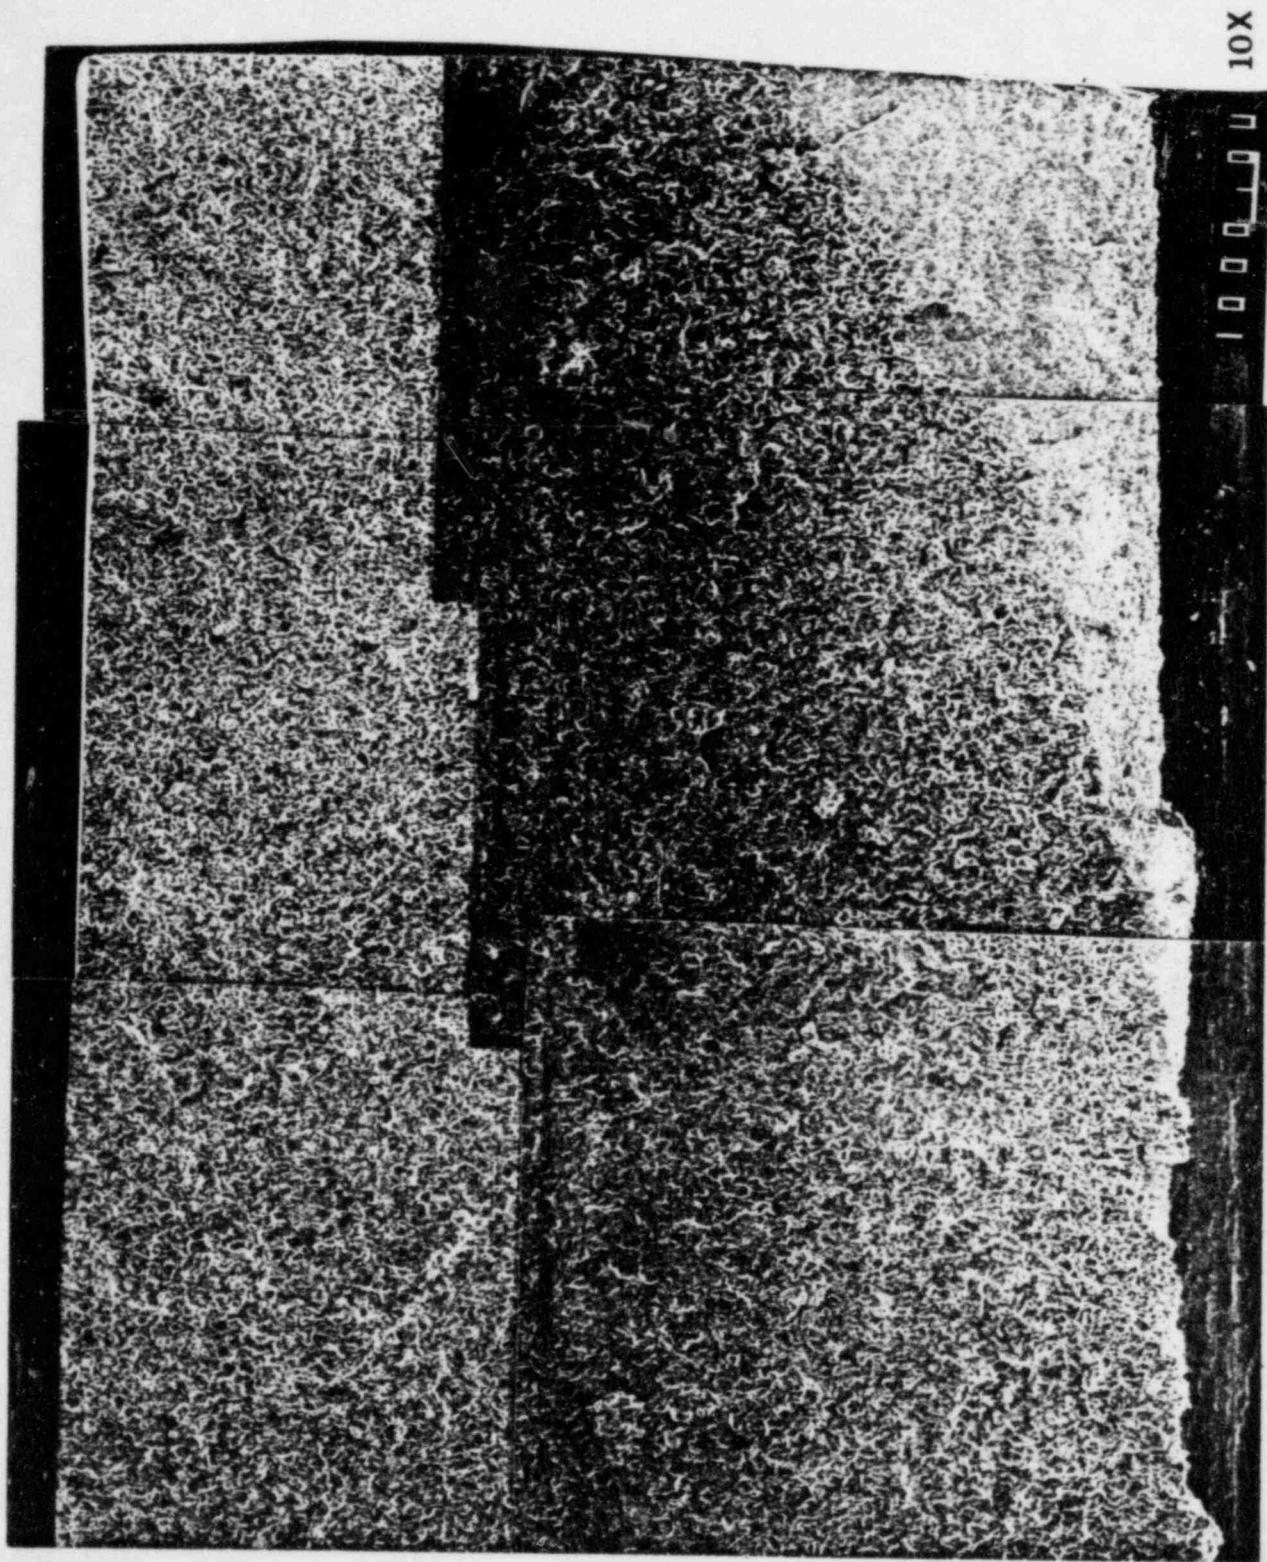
Low magnification fractograph of disc #2 fracture face showing granular appearance.
